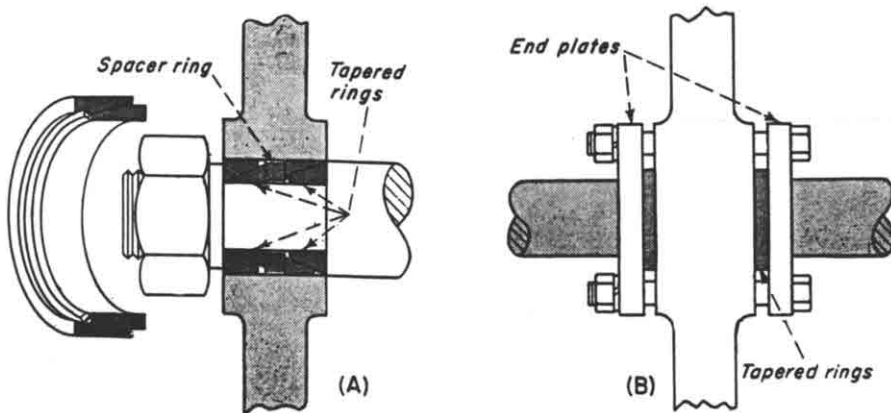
Interlocking tapered rings hold the hub tightly to the shaft when the nut is tightened. Coarse machining of the hub and shaft does not affect concentricity as in pinned and keyed assemblies. A shoulder is required (A) for end-of-shaft mounting. End plates and four bolts (B) allow the hub to be mounted anywhere on the shaft.
